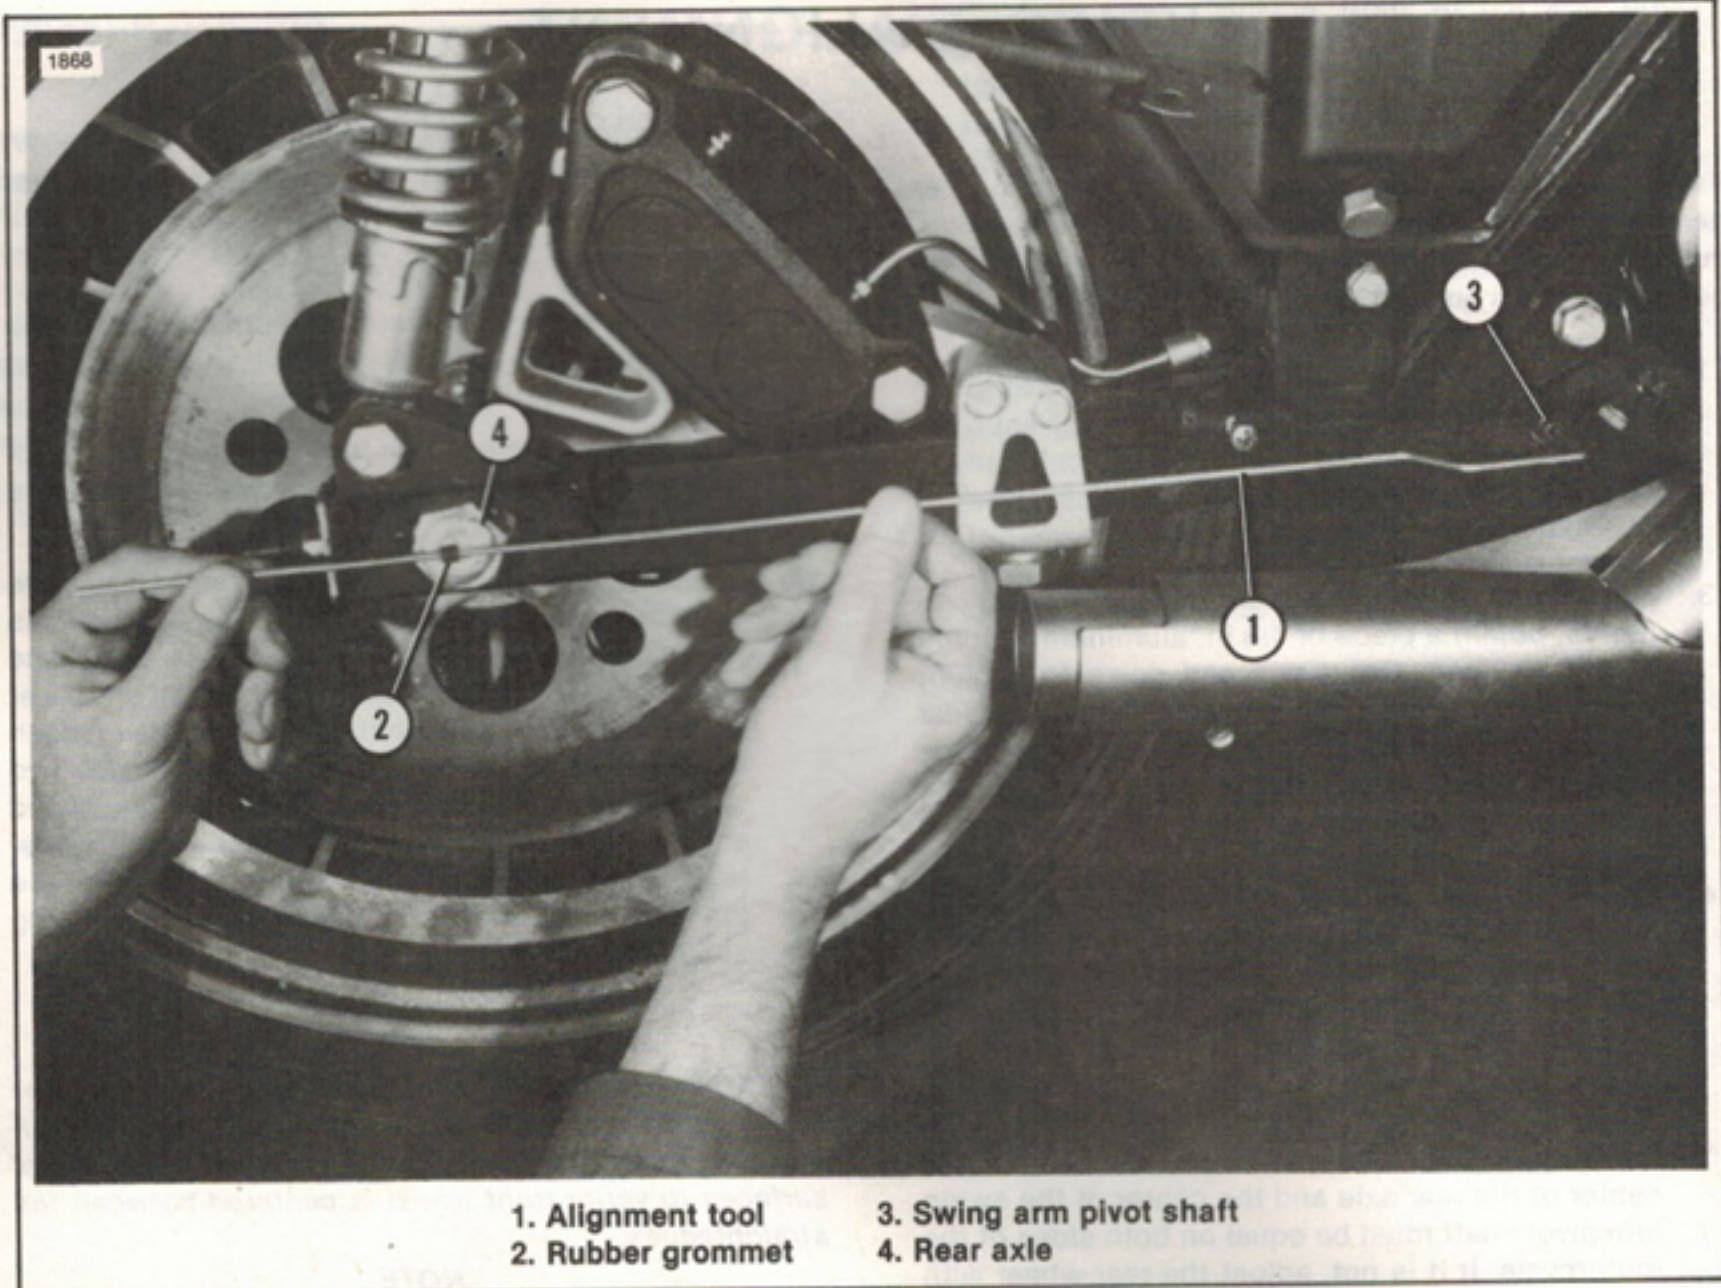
Measuring Rear Axle to Pivot Shaft Distance
